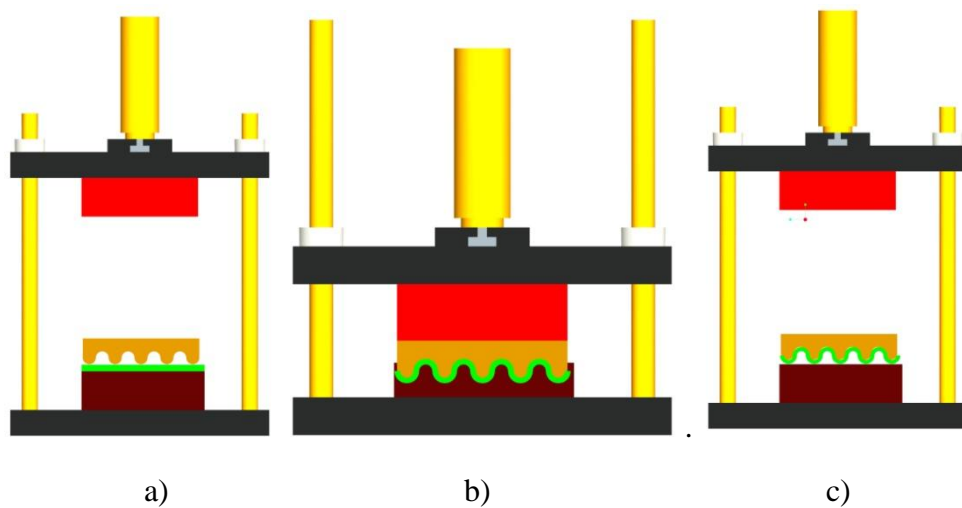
Rubber-assisted embossing: a) mold Preheating stage, b) embossing and cooling, and c) mold opening stage.
